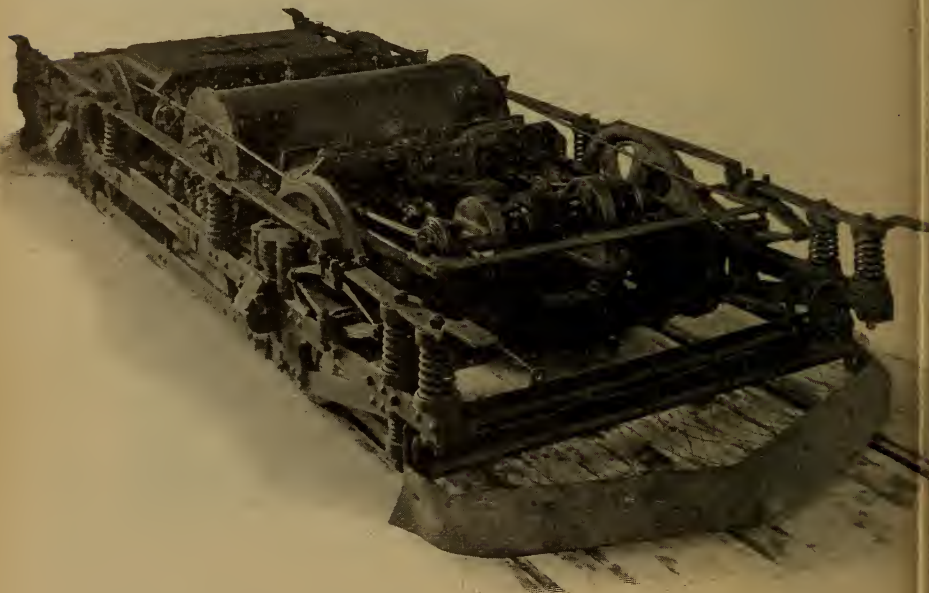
HOADLEY-KNIGHT COMPRESSED AIR MOTOR TRUCK.
